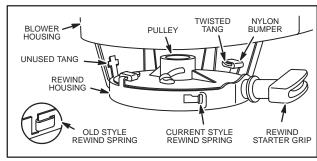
OLD STYLE - MODEL SERIES 60000, 80000, 90000, 100200, 100900 AND 110000
